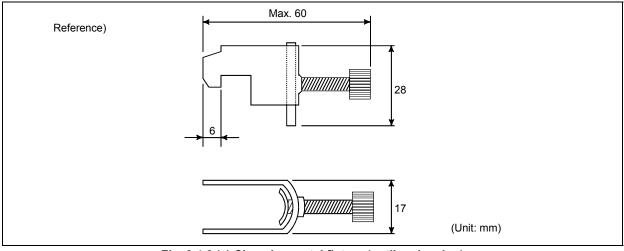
(e) Clamping metal fixture (outline drawing)
